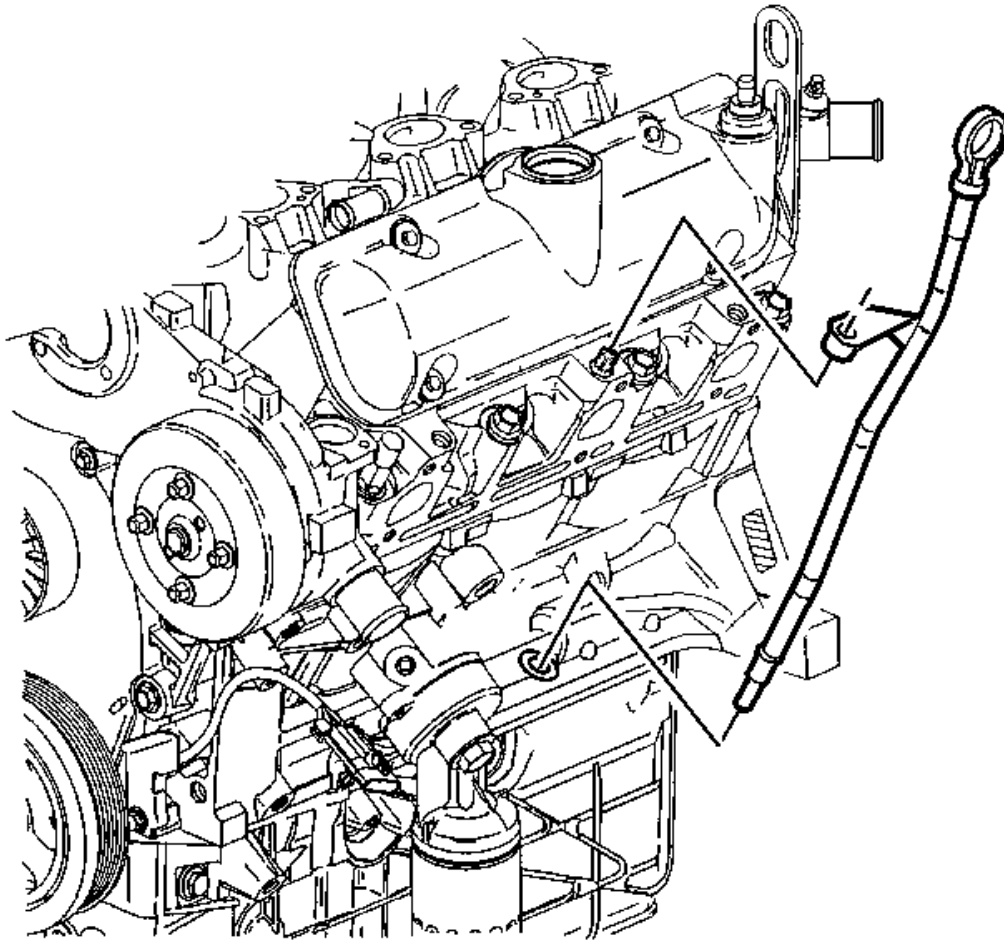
View Of Oil Level Indicator & Oil Level Indicator Tube
